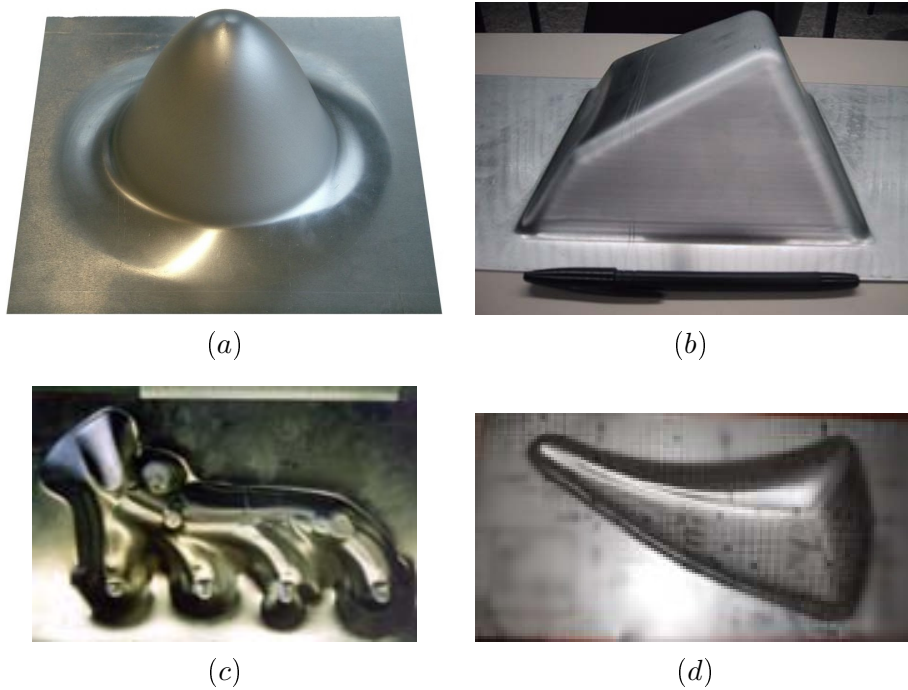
Industrial parts; (a) headlight reflector of a vehicle [JES01b]; (b) solar cooker [JES05b]; (c) automotive heat/noise shield and (d) motorbike gas tank [JES05c].
